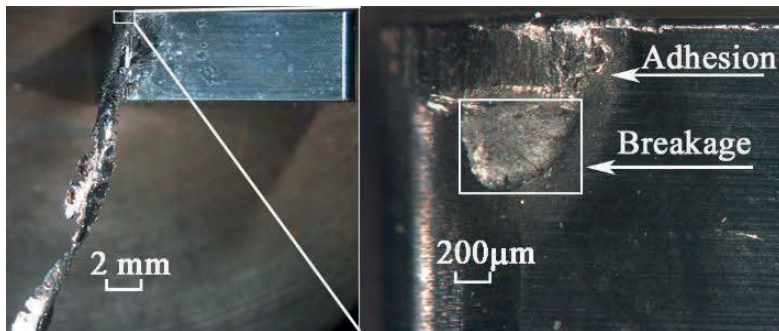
Cutting speed: 200 m/min, cutting length: 100 m, workpiece F440, Tool: K15 carbide
